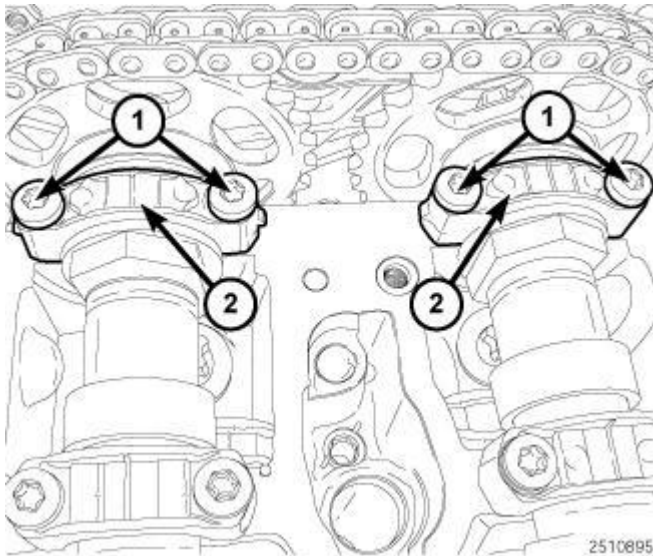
Positioning Cylinder No. 1 Piston To Ignition TDC
